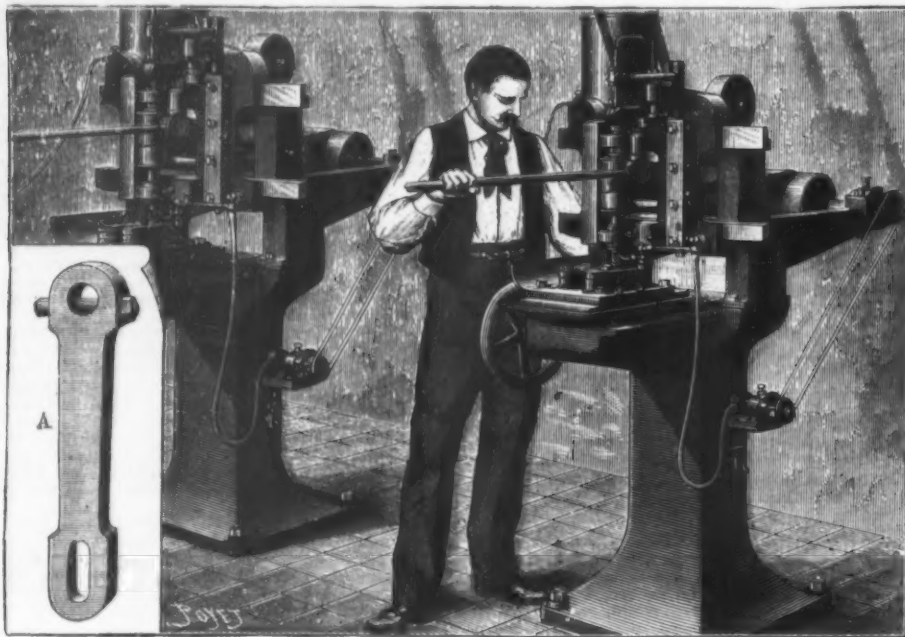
SHAPING MACHINE—A, CRANK AND ITS KEY.
